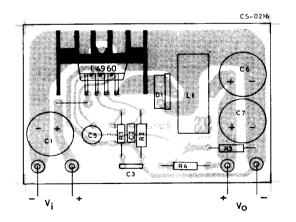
P.C. board and component layout of the circuit of fig. 3 (1:1 scale)
